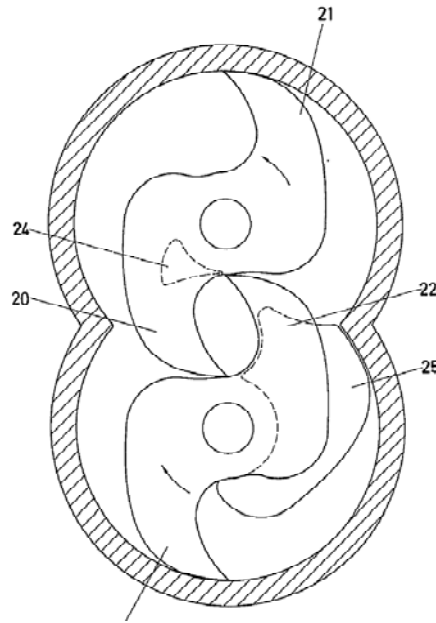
Identical symmetrically-shaped 2-claw rotor [11]
